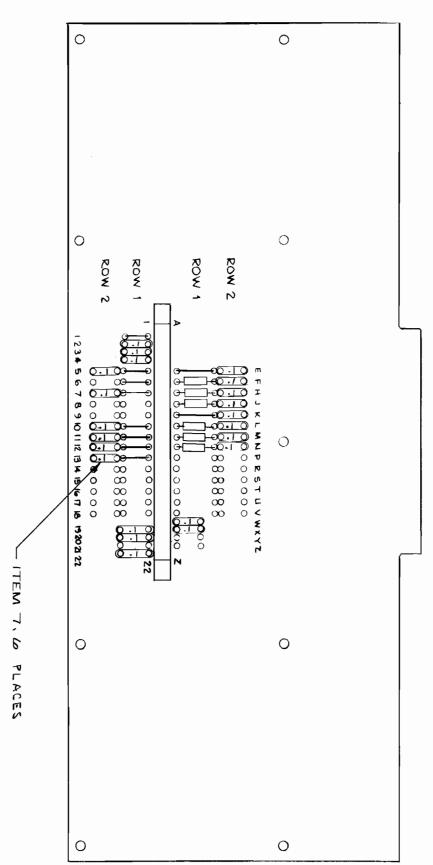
RF Shield PCB Assembly A006446-01 B
